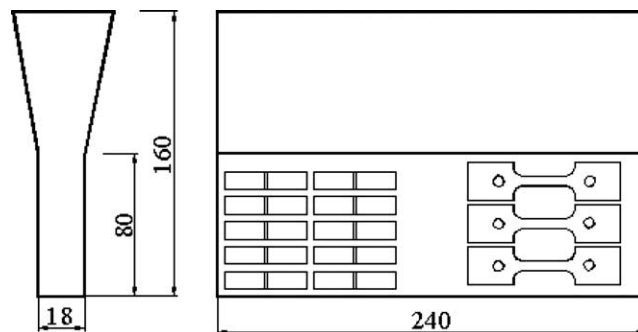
Dimensions of Y-block casting and location of specimens in the casting.
